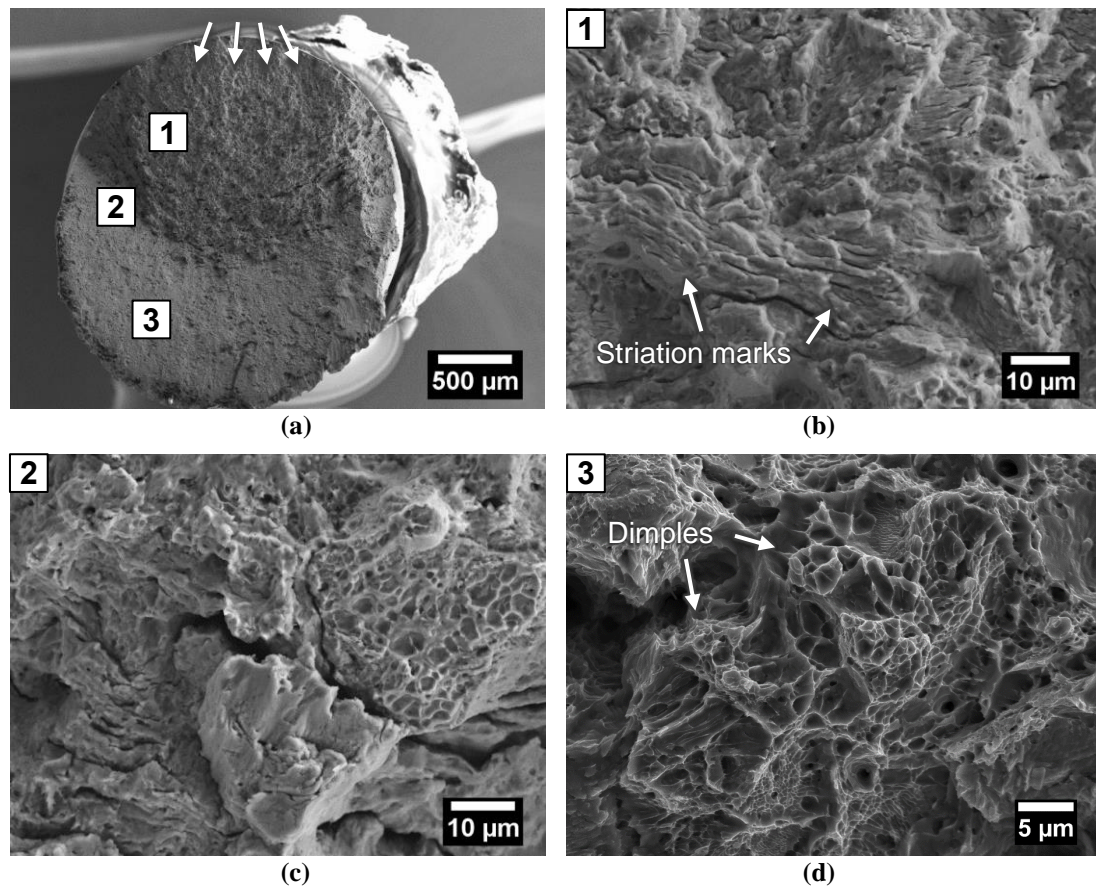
Fractographic analysis of the fractured surfaces in the cold-drawn pearlite specimens at $\Delta\epsilon_f=0.8\%$, showing the (a) fracture surface; (b) fatigue striation marks; (c) intersection between fatigue and final fracture zones; and (d) final ductile fracture
